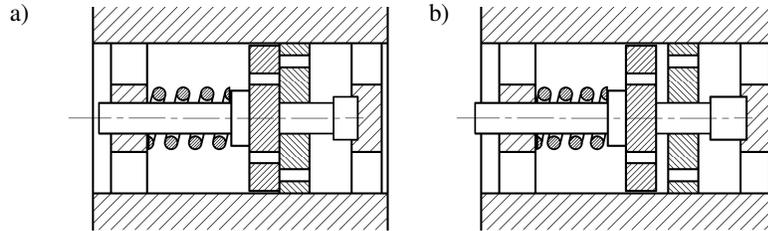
Cross-sectional view through the valve: a) closed, b) opened.
